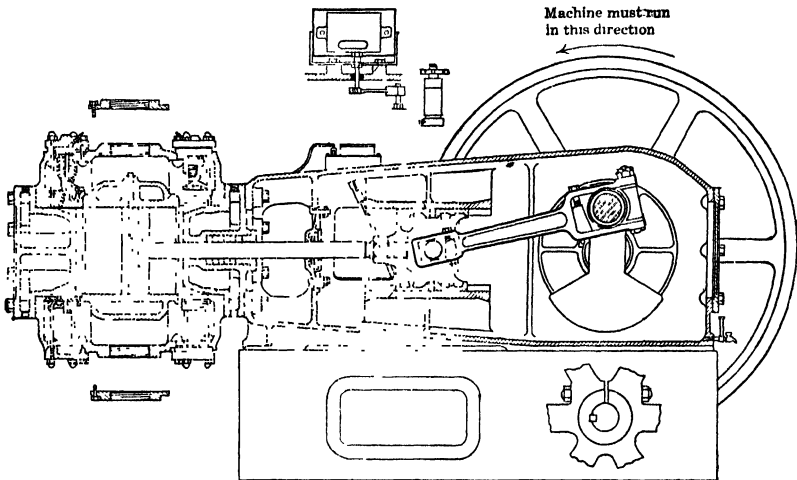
Single-stage belt-driven compressor. (Chicago Pneumatic Tool Co.)
